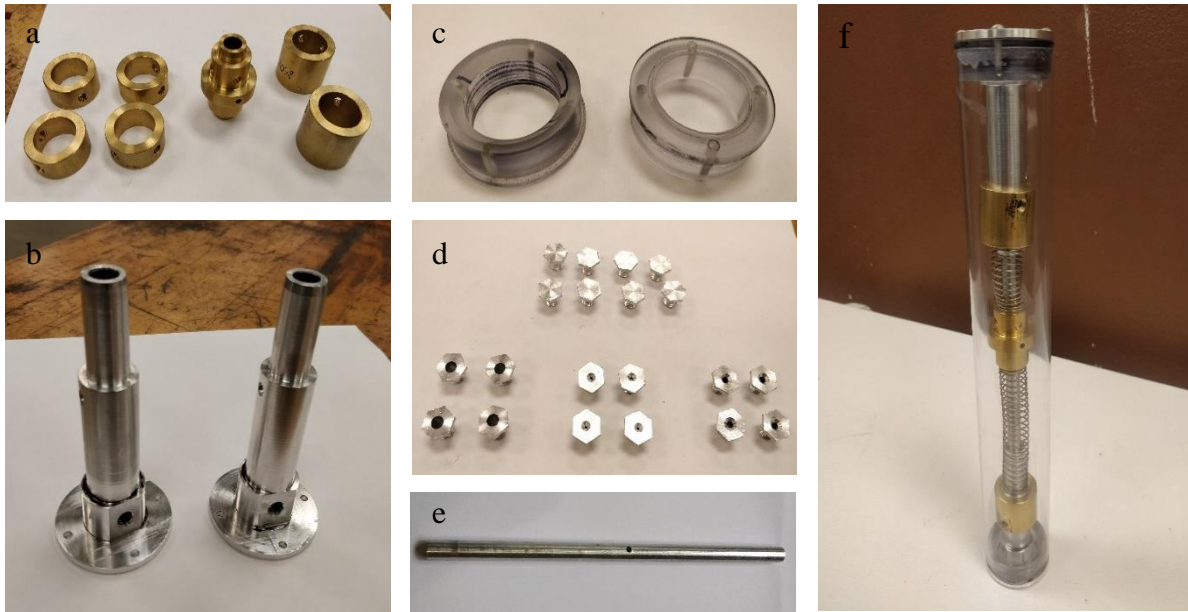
1:5 scaled model; (a) PTO masses, (b) damper house, (c) hull end, (d) screws with different diameter holes, (e) damper rod, and (f) the assembled model.
